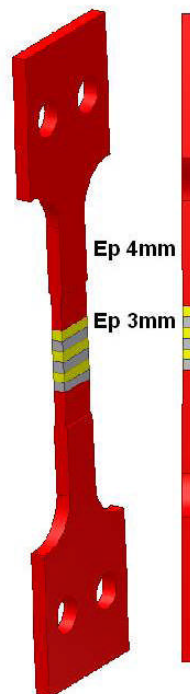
Details of the welding trials / specimen manufacture (Source: Alfa Laval)
